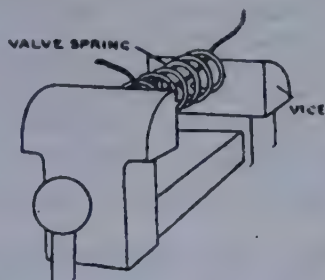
Tie the Valve Spring Before Trying to Replace it
